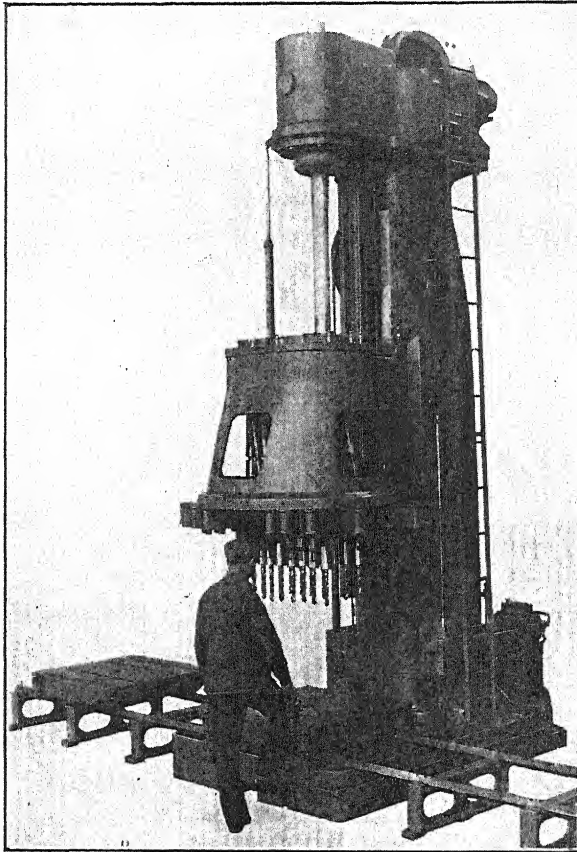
The Special National Automatic Tool Co. Multiple-Spindle Cluster-Type Drilling Machine.
